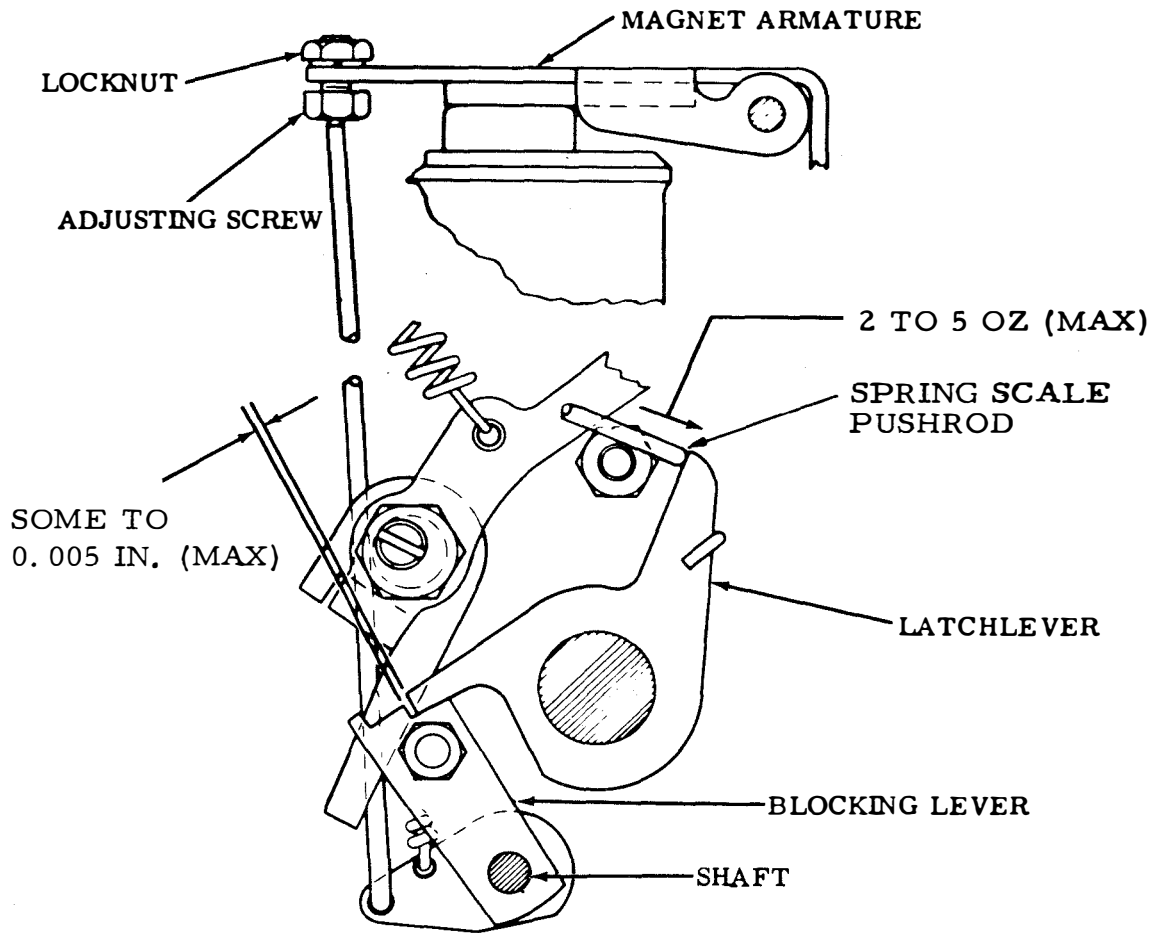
Latchlever Torsion Spring and Blocking Lever
